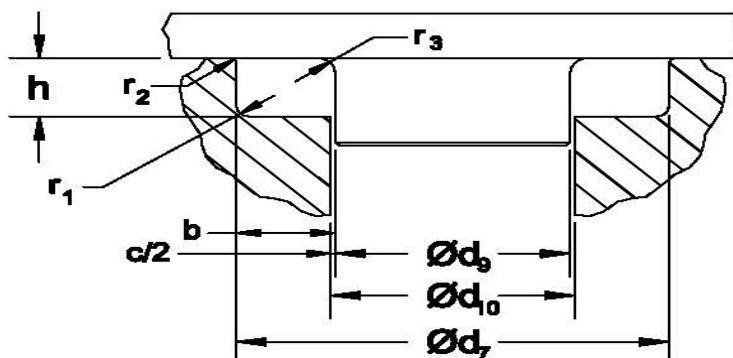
Face seal groove dimensions, plug style, internal pressure applications only
